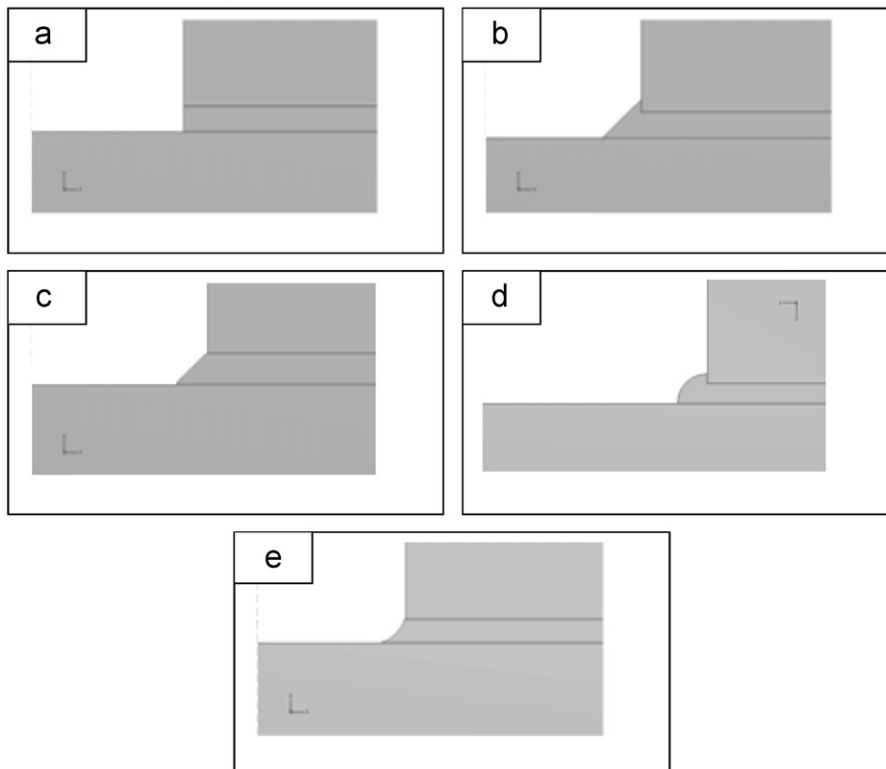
Configurations of free edges of the lap joints: (a) straight edge, (b) 45° standard chamfer [1], (c) 45° chamfer, (d) standard spew fillet [13] and (e) spew fillet with adhesive contraction.
